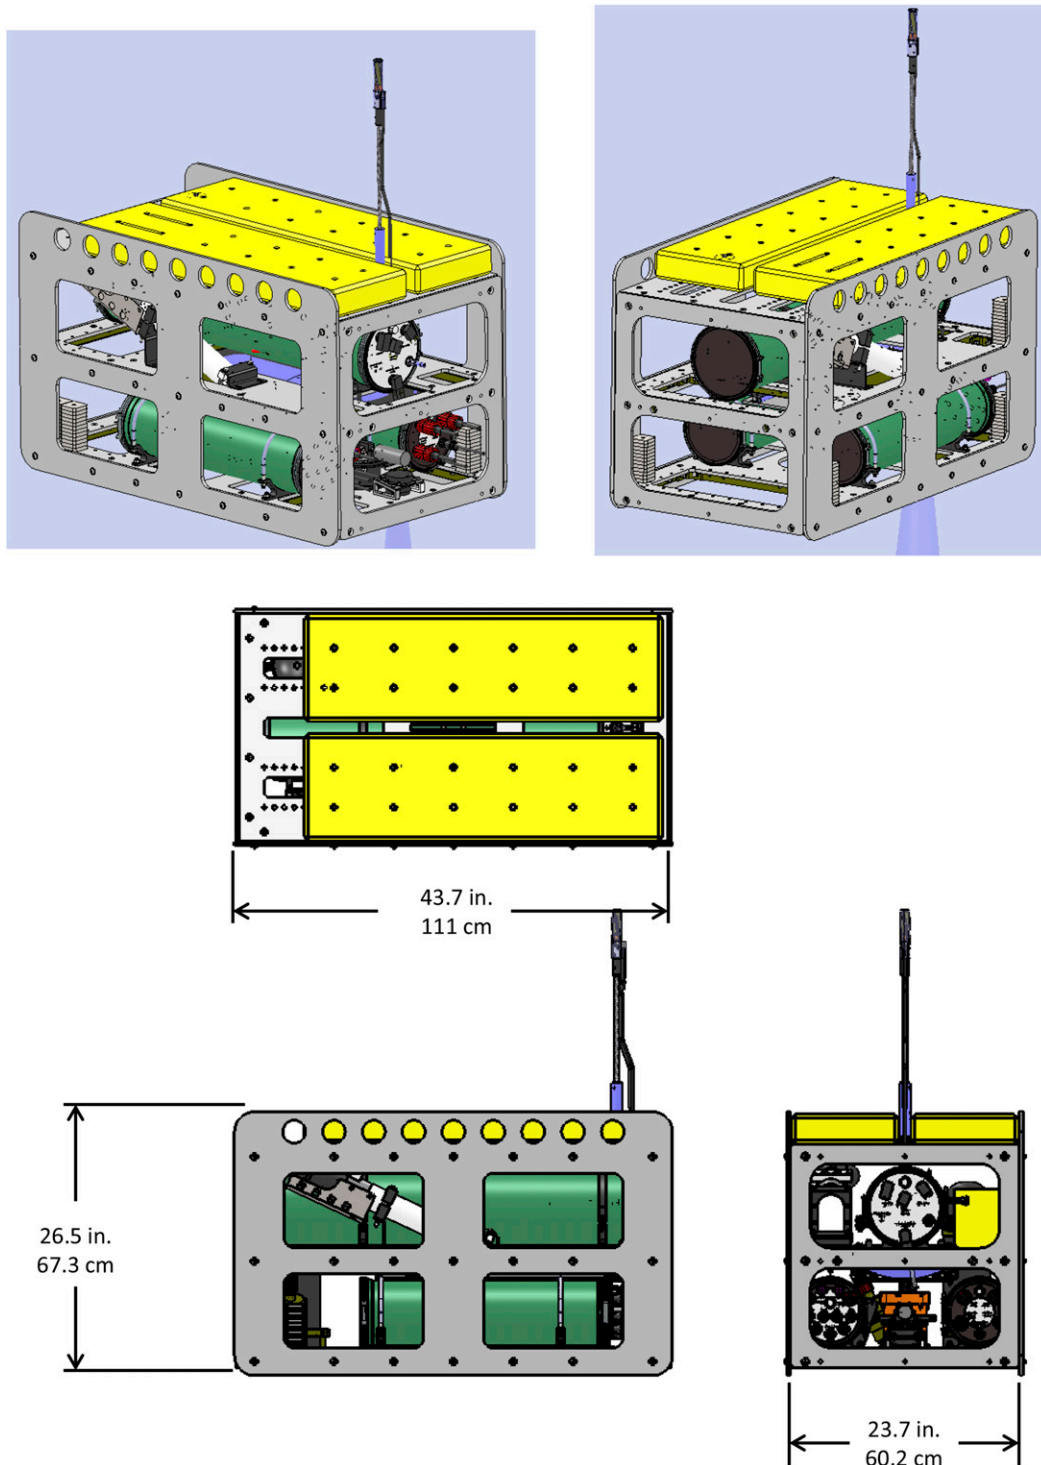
Schematic drawing of the CBD. Courtesy of SeaScan, Inc.
